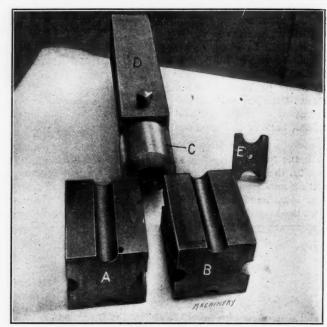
Type of Dies and Tools used in the Continuous-motion Bolt and Rivet Header shown in Fig. 24
